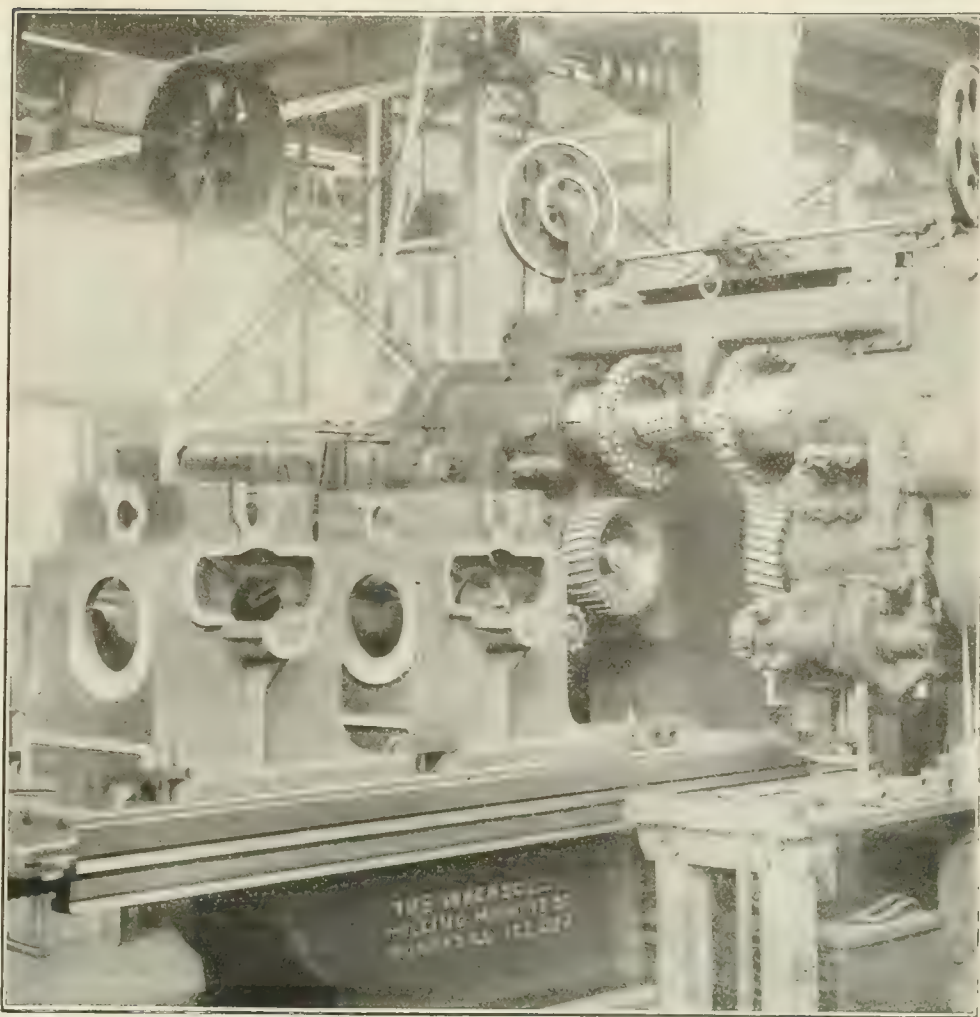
Special Ingersoll Milling Machine for Finishing Crank Cases.
